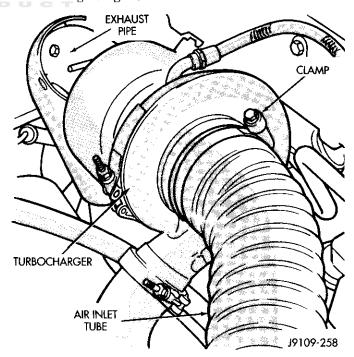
Air Inlet Tube and Exhaust Pipe Connection
